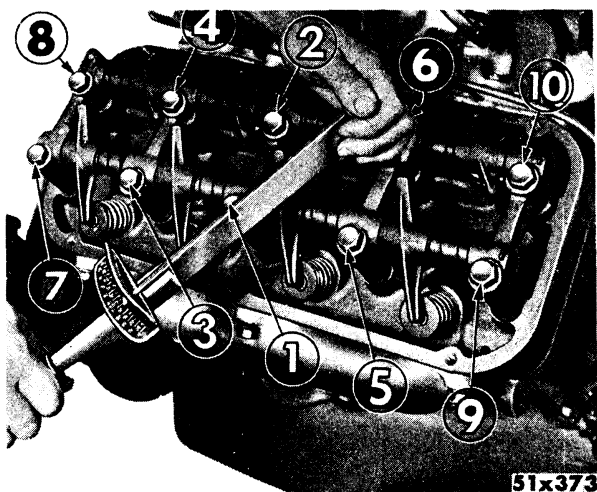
Tightening Cylinder Head Bolts (FirePower)
